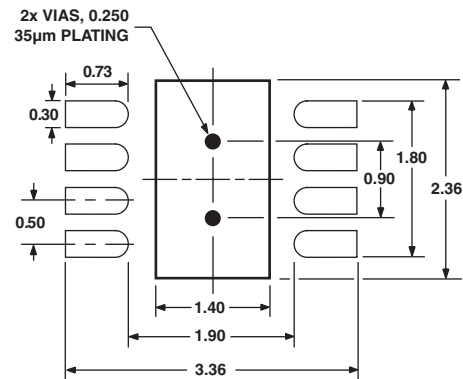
3 mm x 3 mm LFCSP Pad Pattern (Dimensions shown in millimeters)
